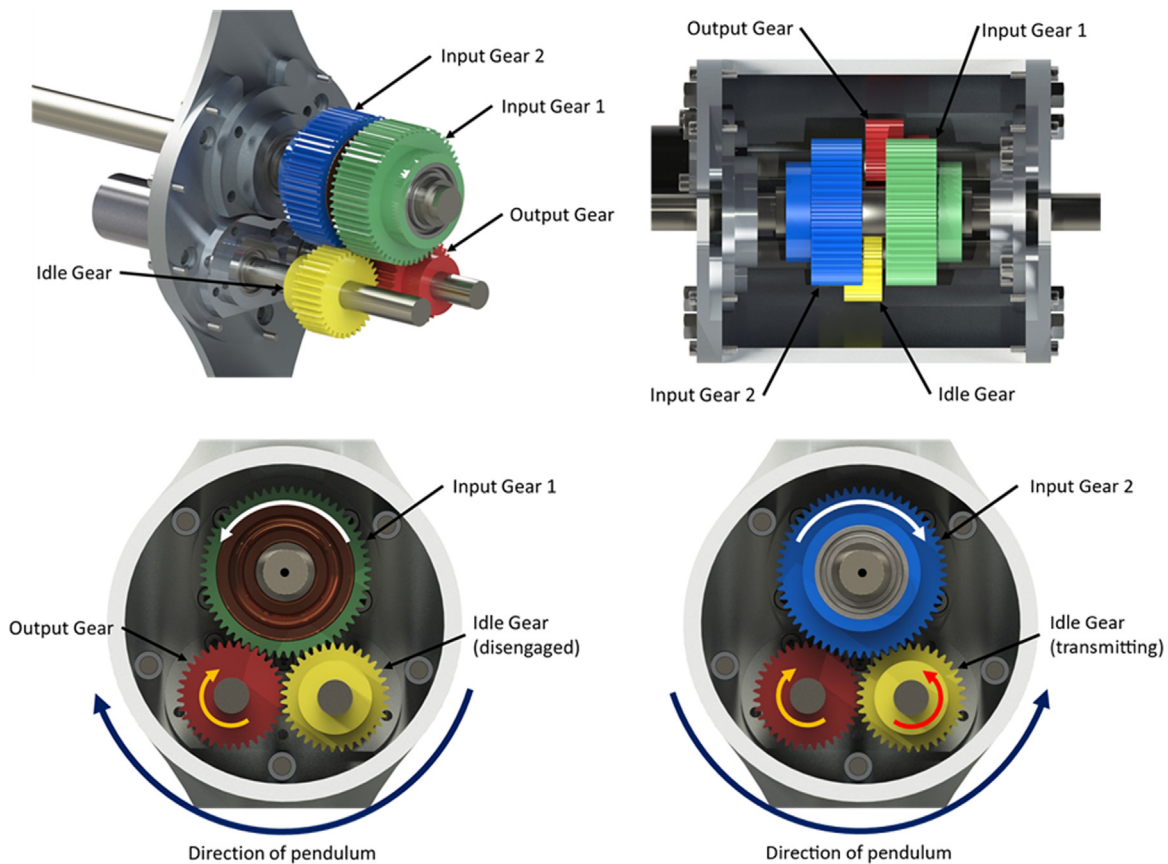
Operation of the Mechanical Rotation Rectifier system during motion: (a) Gearing assembly, (b) Top-down view of gearing assembly, (c) End view during clockwise rotation of the pendulum, and (d) End view during anticlockwise rotation of the pendulum.
